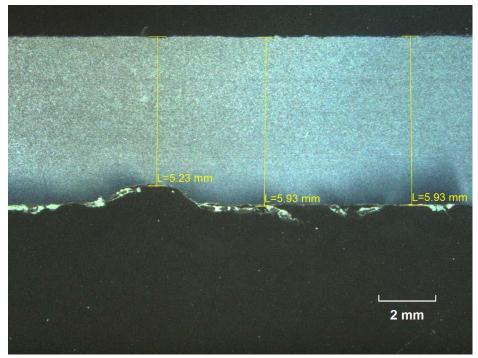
Cross Section of Coupon 8 at Area of Maximum Wall Loss
